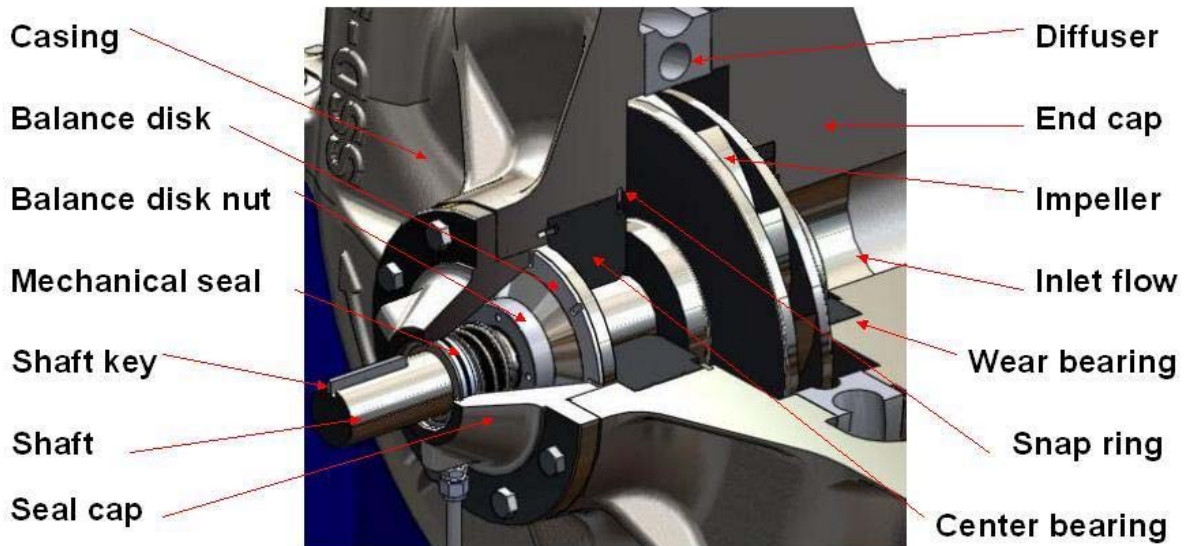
A cutout view of the SSD-500 pump's internal assembly (temporary).
